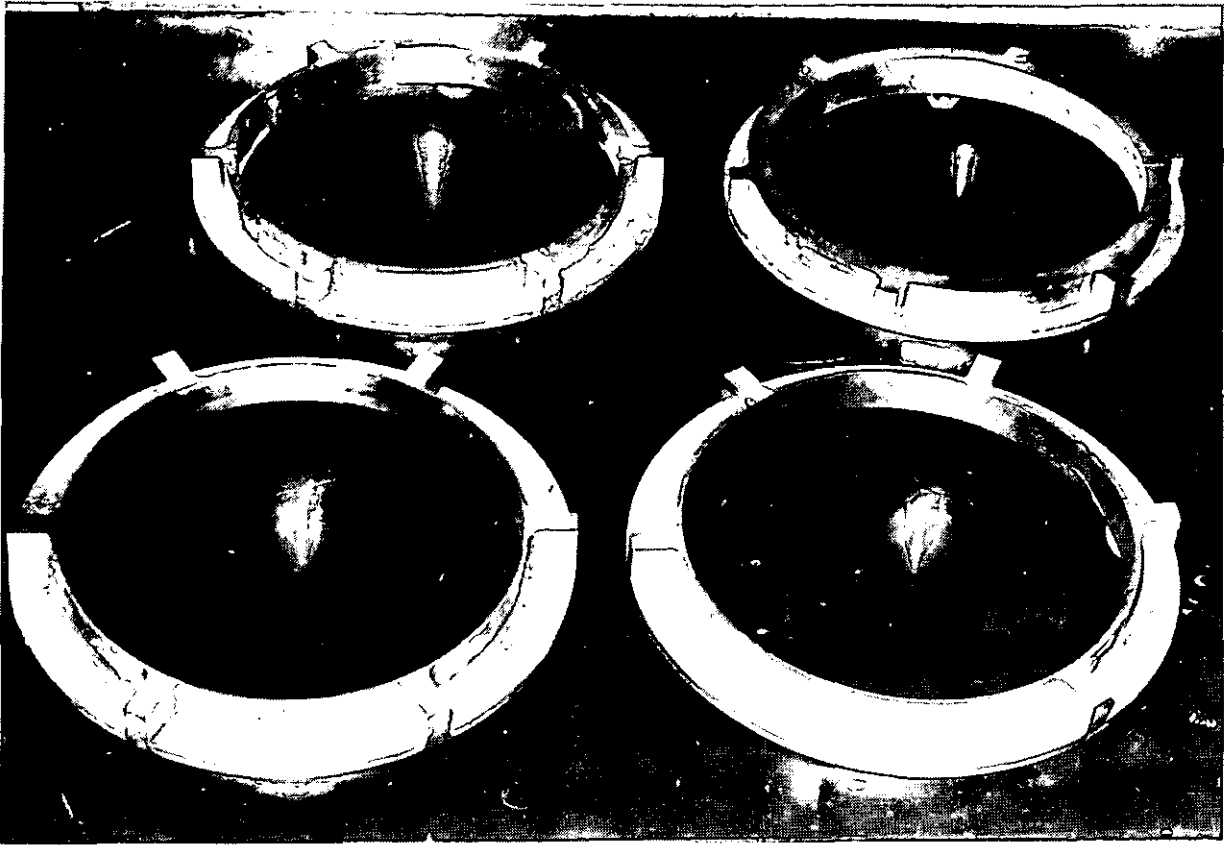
ADAPTOR RINGS FOR FLANGE BREADTHS
